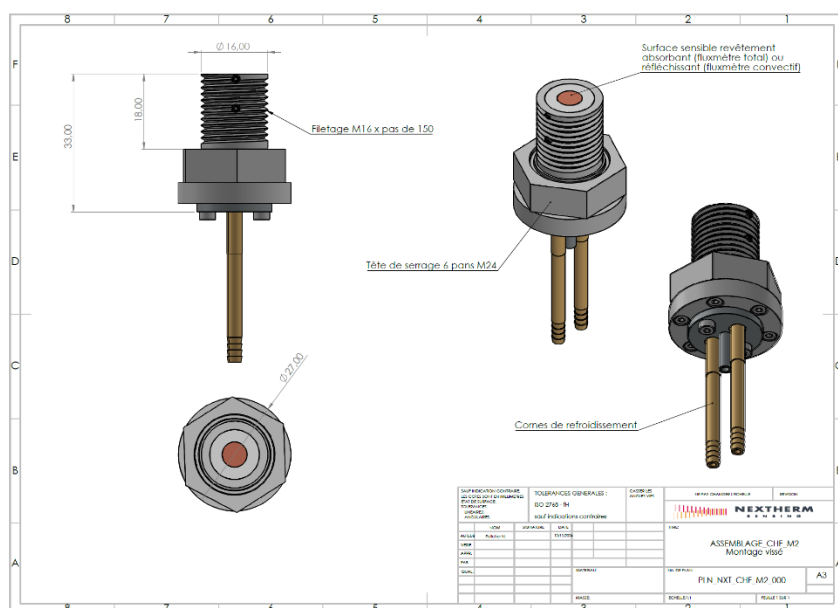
GHF heat flux sensor with M16 threaded mounting interface (reference M2)
